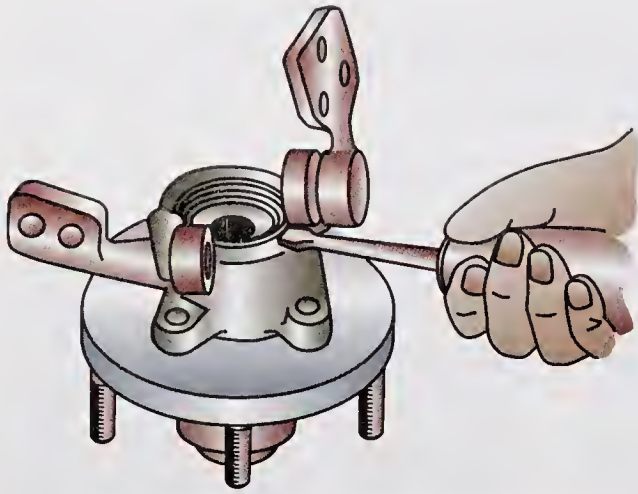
Removing dust deflector from the steering knuckle.
